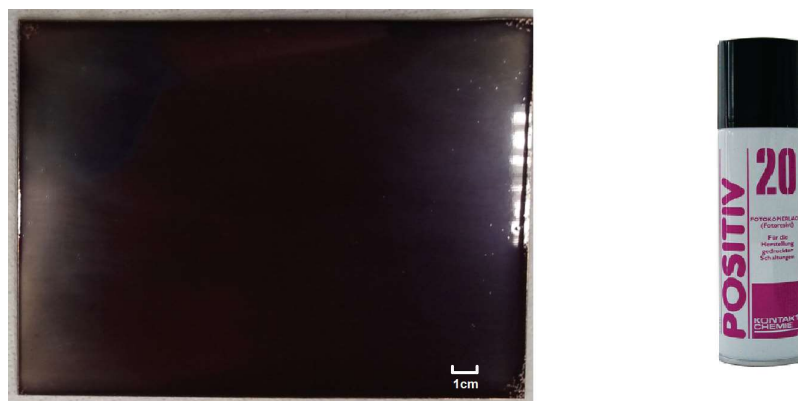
PCB board after Photoresist coating and dark-room drying.
